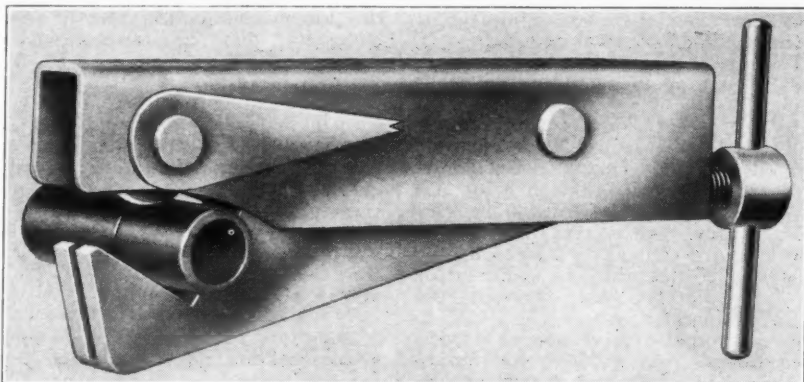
New type of cut-off tool introduced by Riley Engineering Corp.
